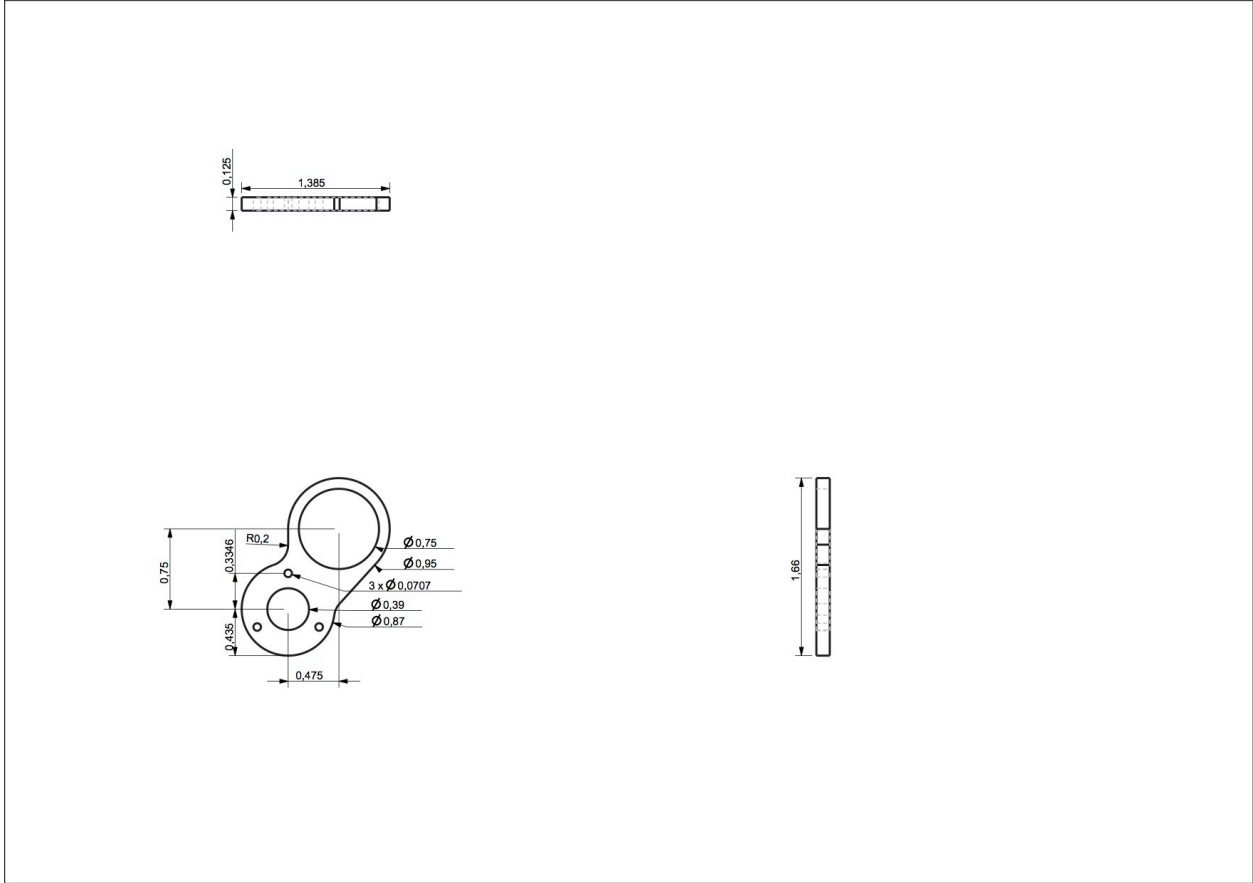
Item 22 – 22 mm motor delrin mounting plate (Inches)
